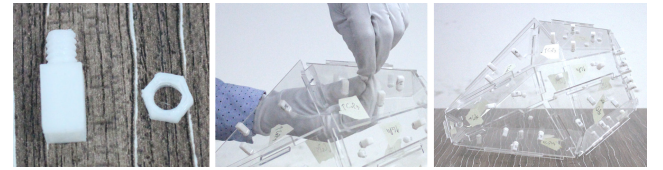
Install printed bolts and nuts in a laser-cut assembly.
